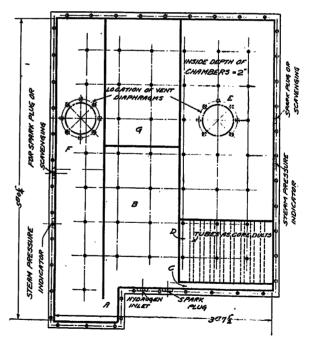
Model of Generator Core, Frame, and Shields used for Explosion Tests
